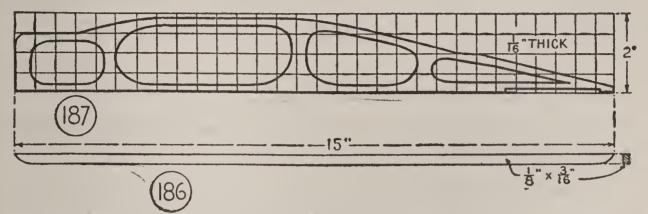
Motor Base. Fig. 187.—Profile Fuselage.
